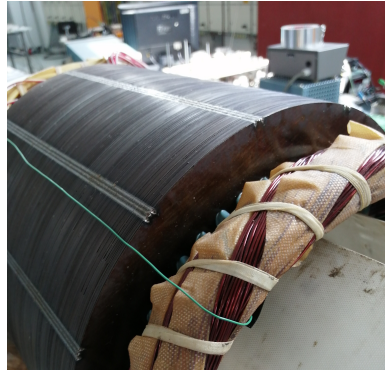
Photograph of an induction motor without rotor and housing. The stator stack was joined using laser welding.
